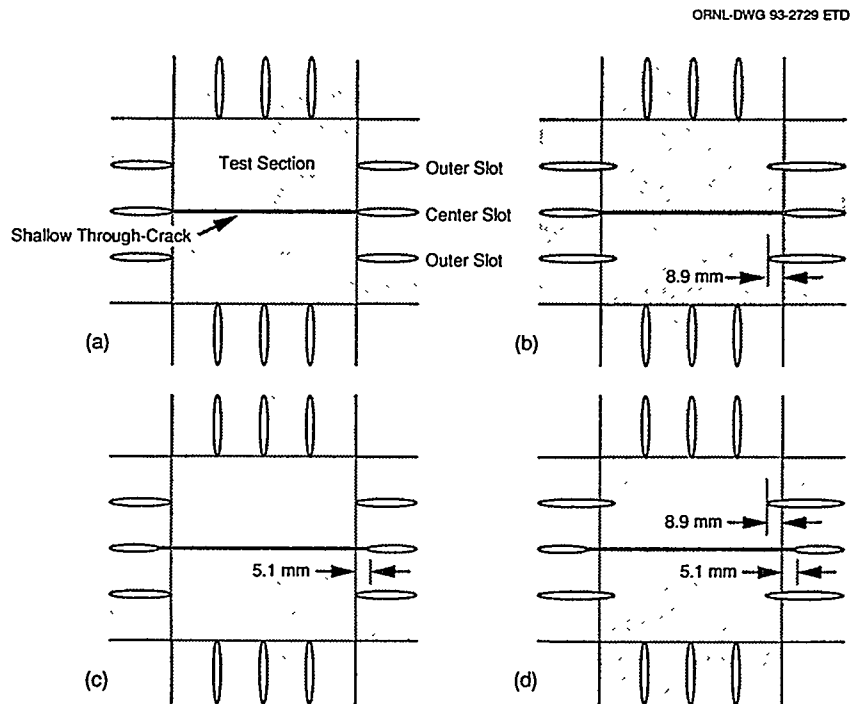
Slot configurations used in analyses of cruciform bend specimen: (a) uniform slots on test section boundary, (b) outer slots extended inward by 8.9 mm across test section boundary, (c) center slot contracted away by 5.1 mm from test section boundary, and (d) superposition of configurations (b) and (c)
